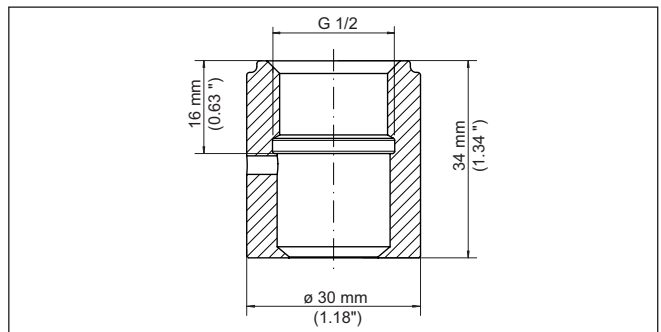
Dimensions direct welded socket G $\frac{1}{2}$ - Cone seal
